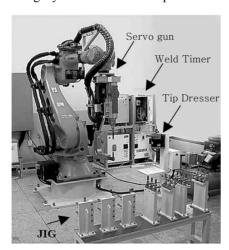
Schematic of experimental setup used in this study; Robot with servo controller, electrode tip dresser, weld timer with adaptive control function, and sample jig
